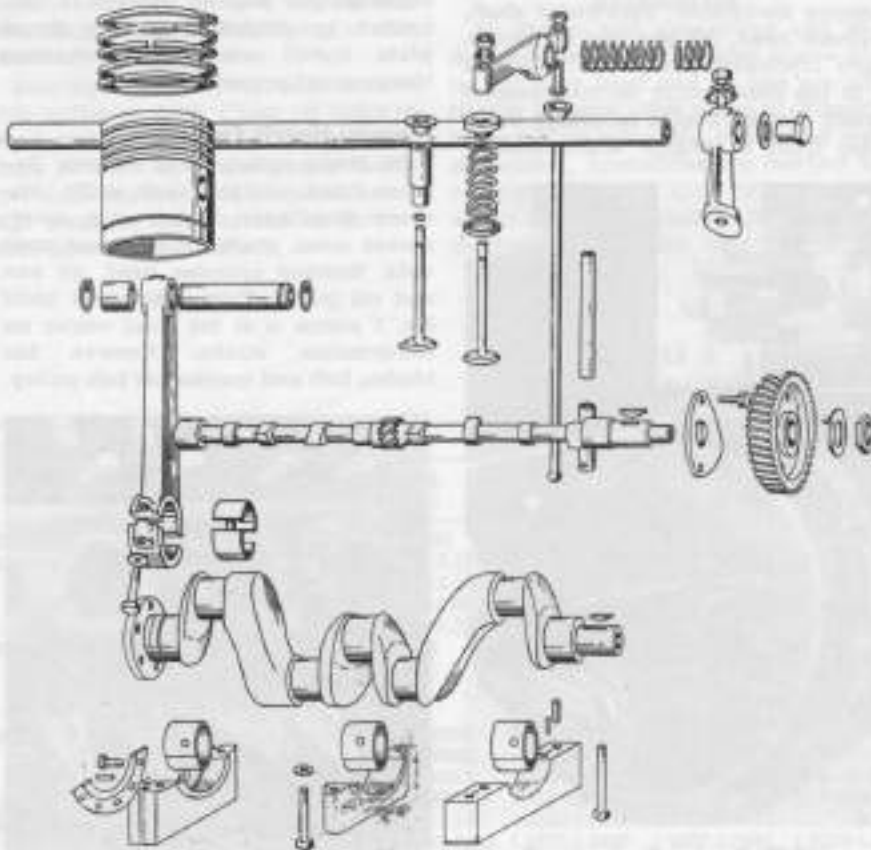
Massey-Harris engine parts on later engines. Rod cap is retained with bolts instead of screws as shown.
